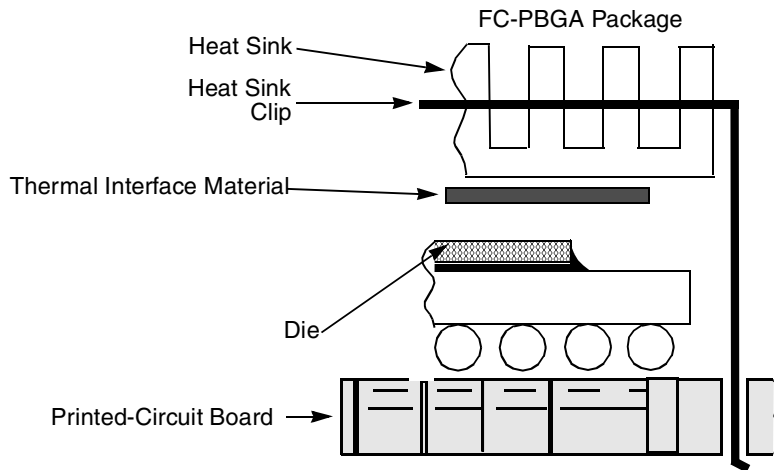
Package Exploded Cross-Sectional View with Several Heat Sink Options
